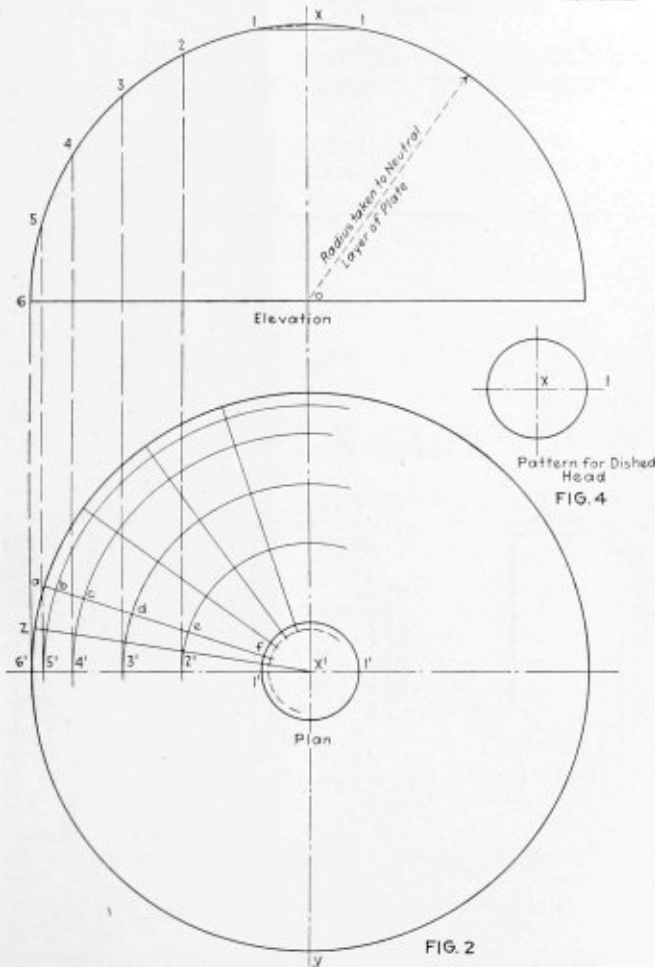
Plan and Elevation of Head With Plan of Gore Shown
